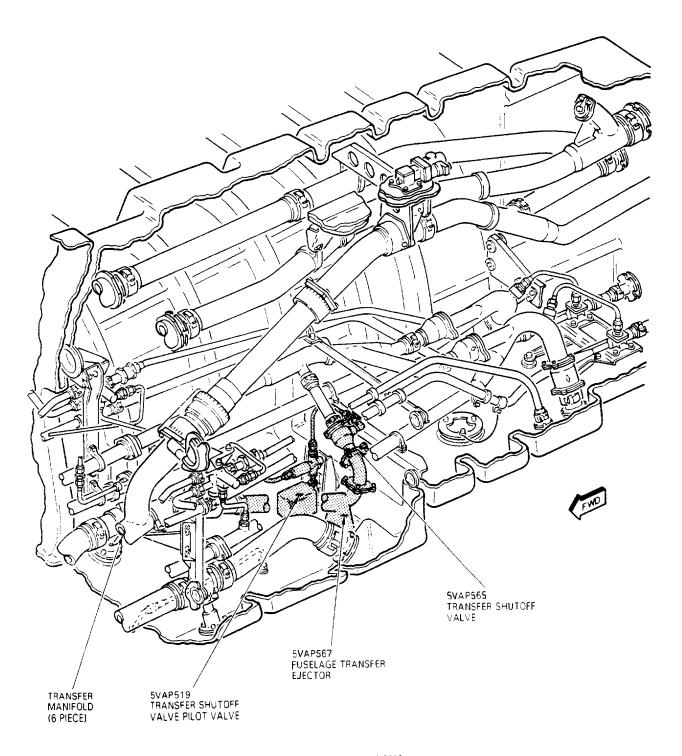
No. 4 Fuel Tank Transfer Test Troubleshooting Component Locator (Sheet 5)
